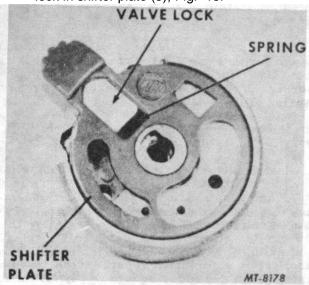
Valve Spring and Lock Installed in Shifter Plate.
